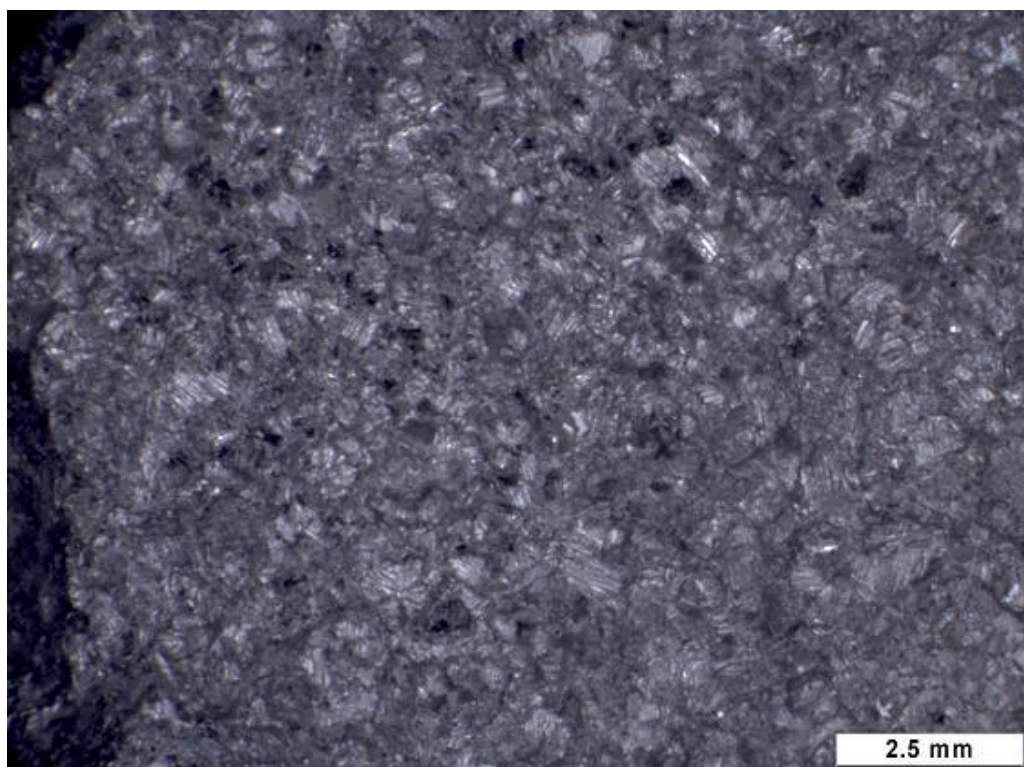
Ti829 LCF test specimen fracture surface
